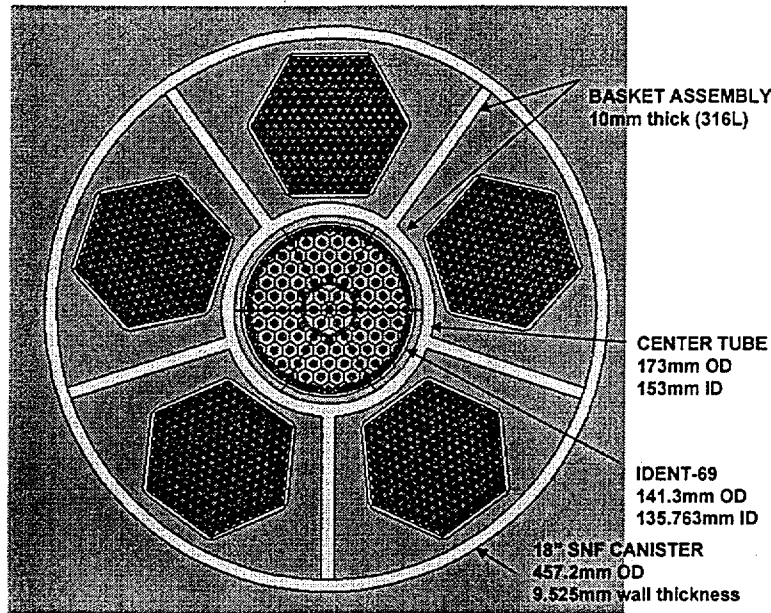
Plan View of the Proposed 18 in. DOE SNF Canister
